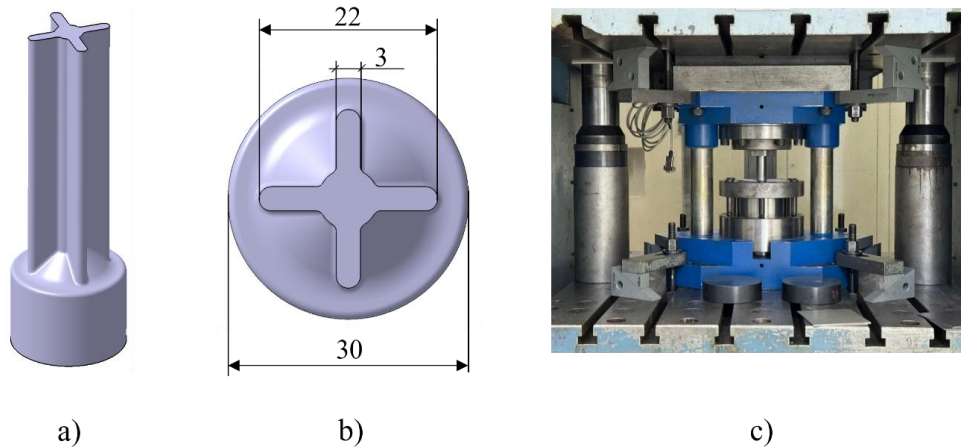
Specimen geometry (a), dimensions (in mm) of the extruded cross-section (b) and used forming tool (c)
